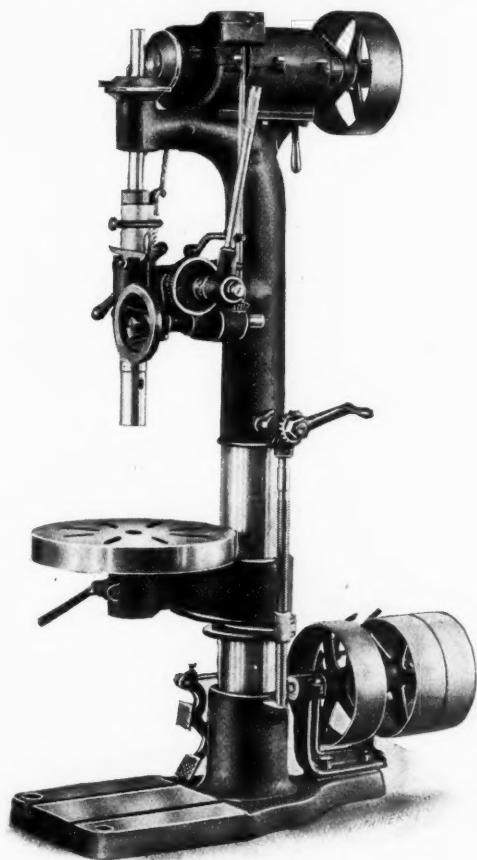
Sibley Drill Press with Geared Quick-change Speeds and Feed
